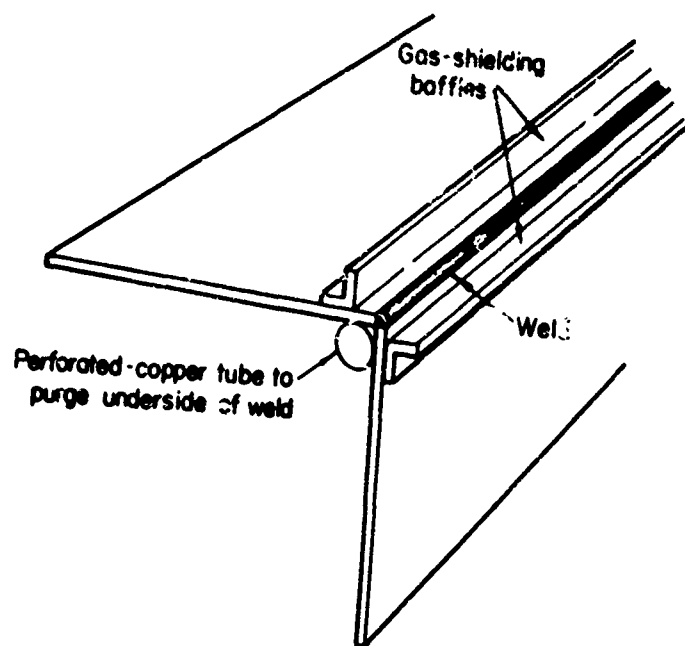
SHIELDING BAFFLES FOR AN OUTSIDE-CORNER WELD (REF. 8)
